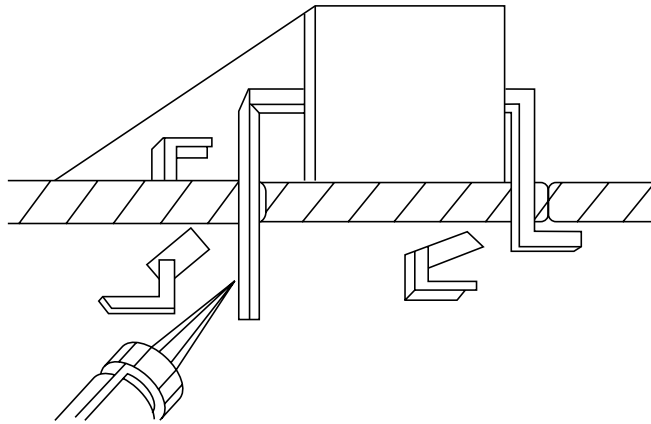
USE SOLDERING IRON TO PRY LEADS
